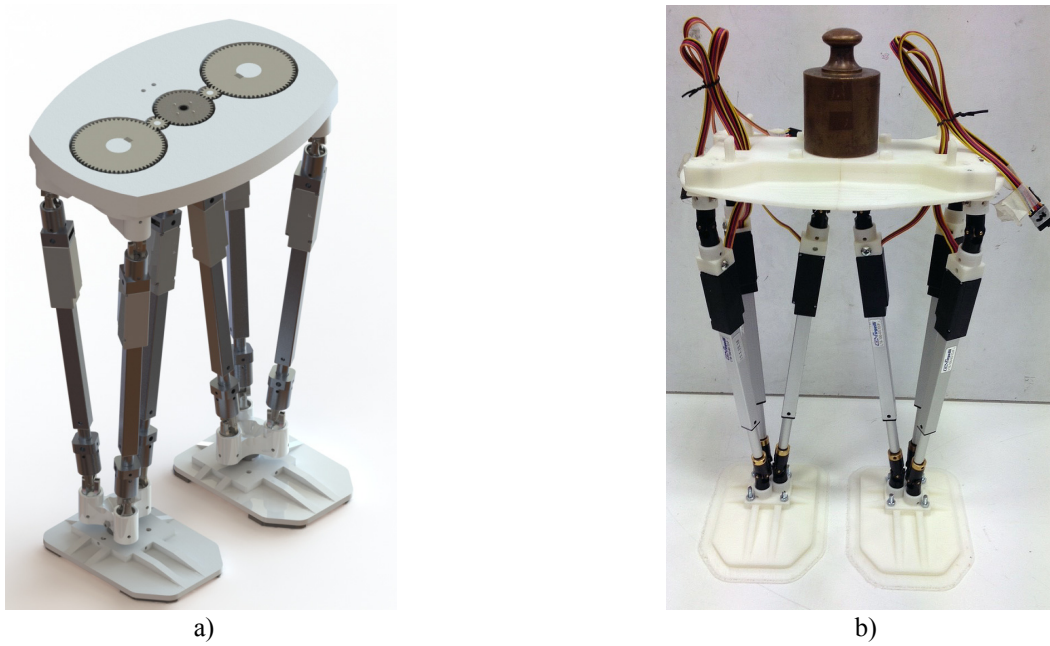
LARM tripod Locomotor: a) CAD Design, b) 3D printed prototype.
